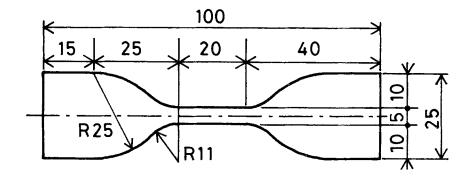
Outline and dimensions of the dumbbell-shaped⁽³⁾ specimen for ozone-aging tests.
